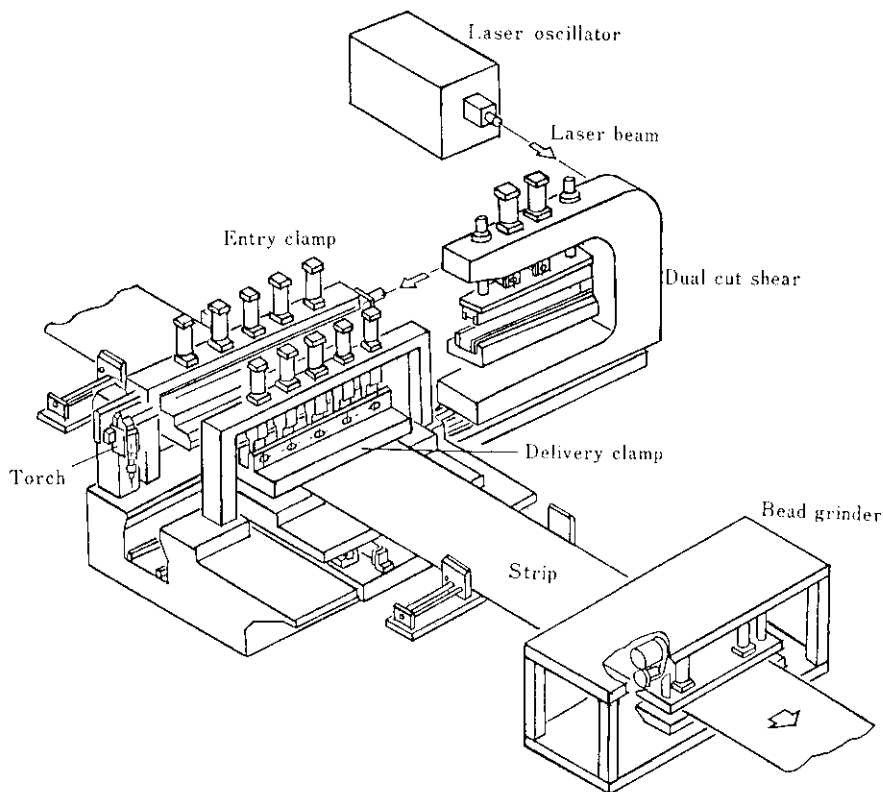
Arrangement of pickling line (at entry section)Fig. 2 Schematic diagram of laser welder and bead grinder
